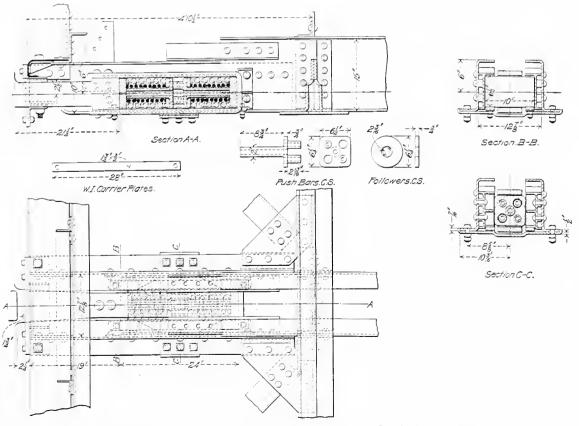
Extended Steel Draft Beams from End Sill to Body Bolster. Gould Coupler Co.
